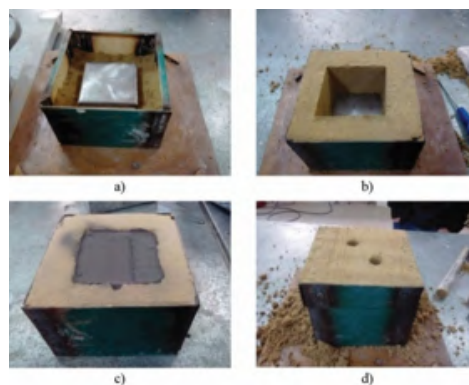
Experimental mold: (a) installation of a metal basis in the form on model; (b) sand-clay form with a cavity for thermite charge; (c) compacted thermite mixture in the form; (d) form assembled with a hole for burning thermites and gas removal.
